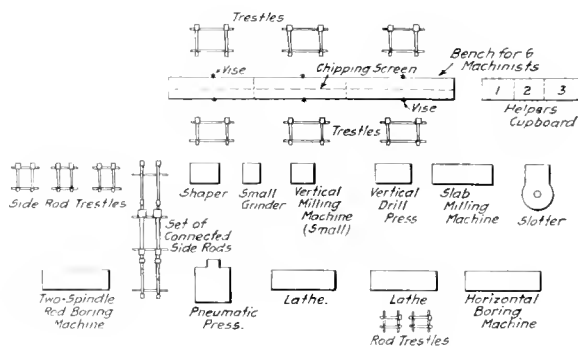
Arrangement of Tools and Benches for the Rod Job
